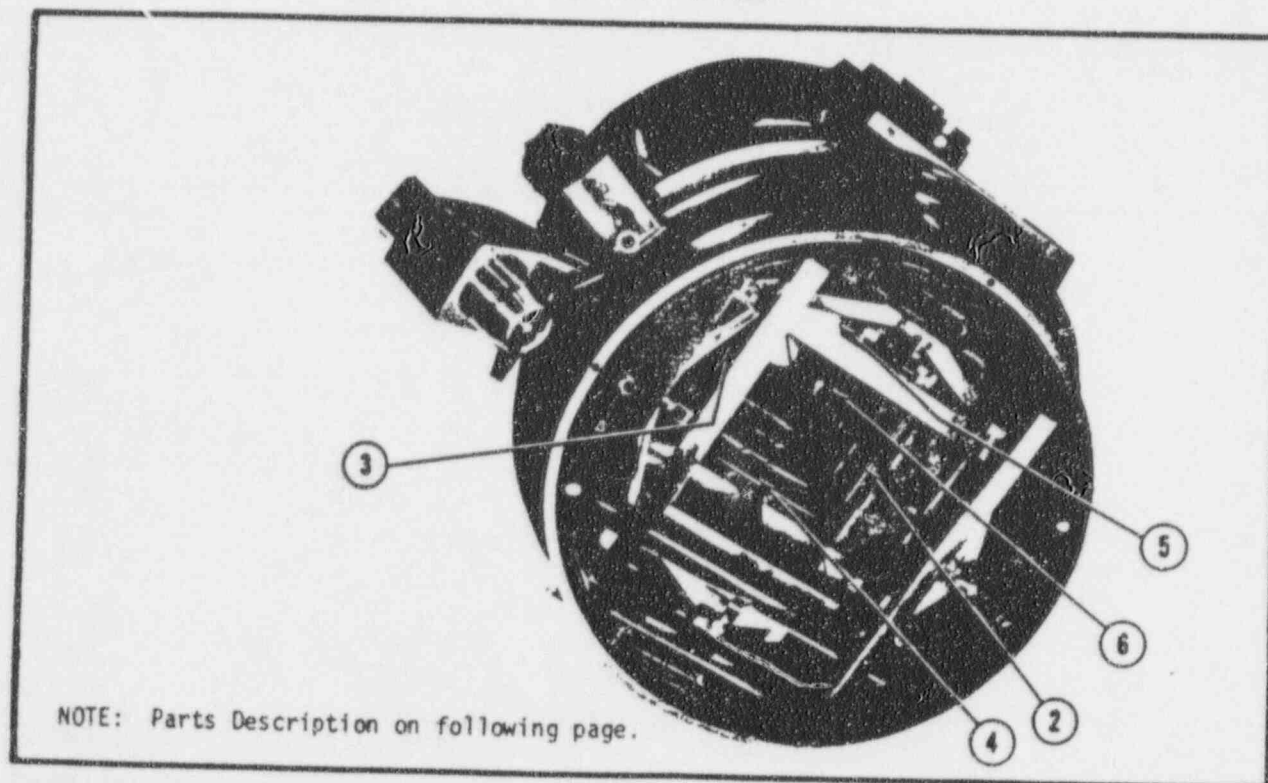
COBALT COLLIMATOR MAIN CROSS ASSEMBLY
